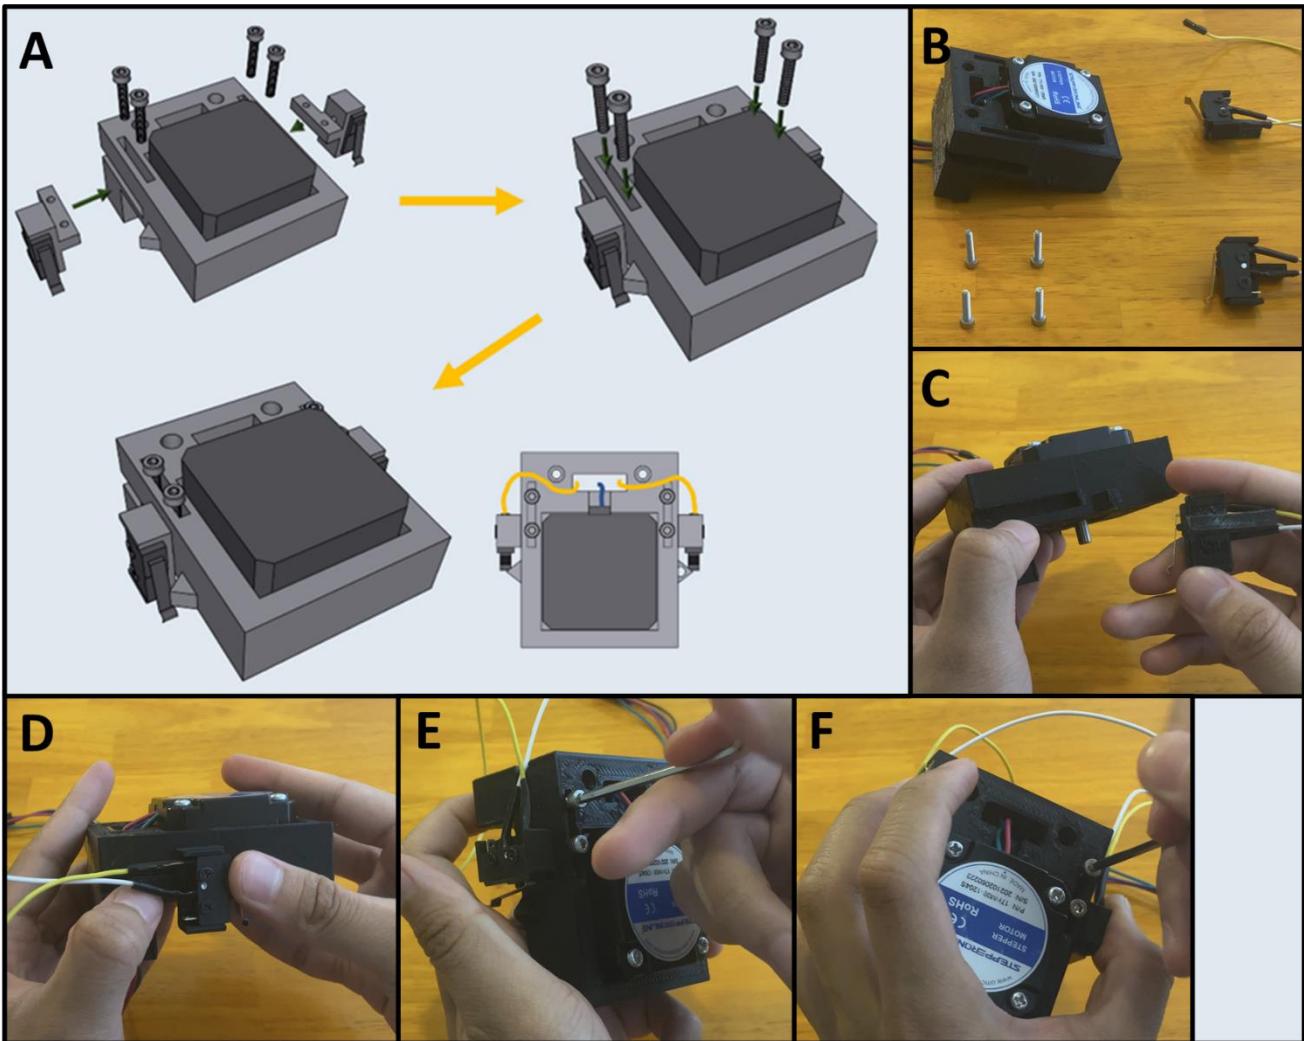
f: The procedure for mounting the limit switches to the Upper Motor Mount.
